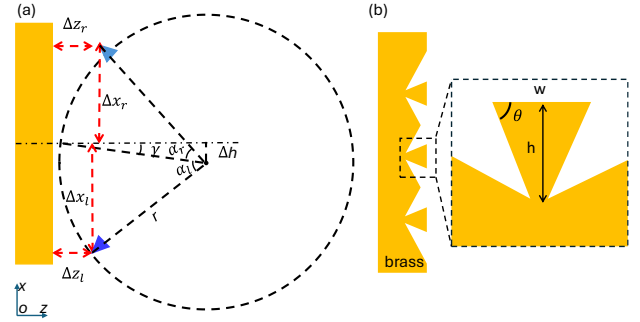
The schematic diagram shows the ultraprecision machining of re-entrant structures with (a) the moving of cutting tool under view of xoz plane of machine tool and (b) the re-entrant structures generated by ultra-precision machining.
